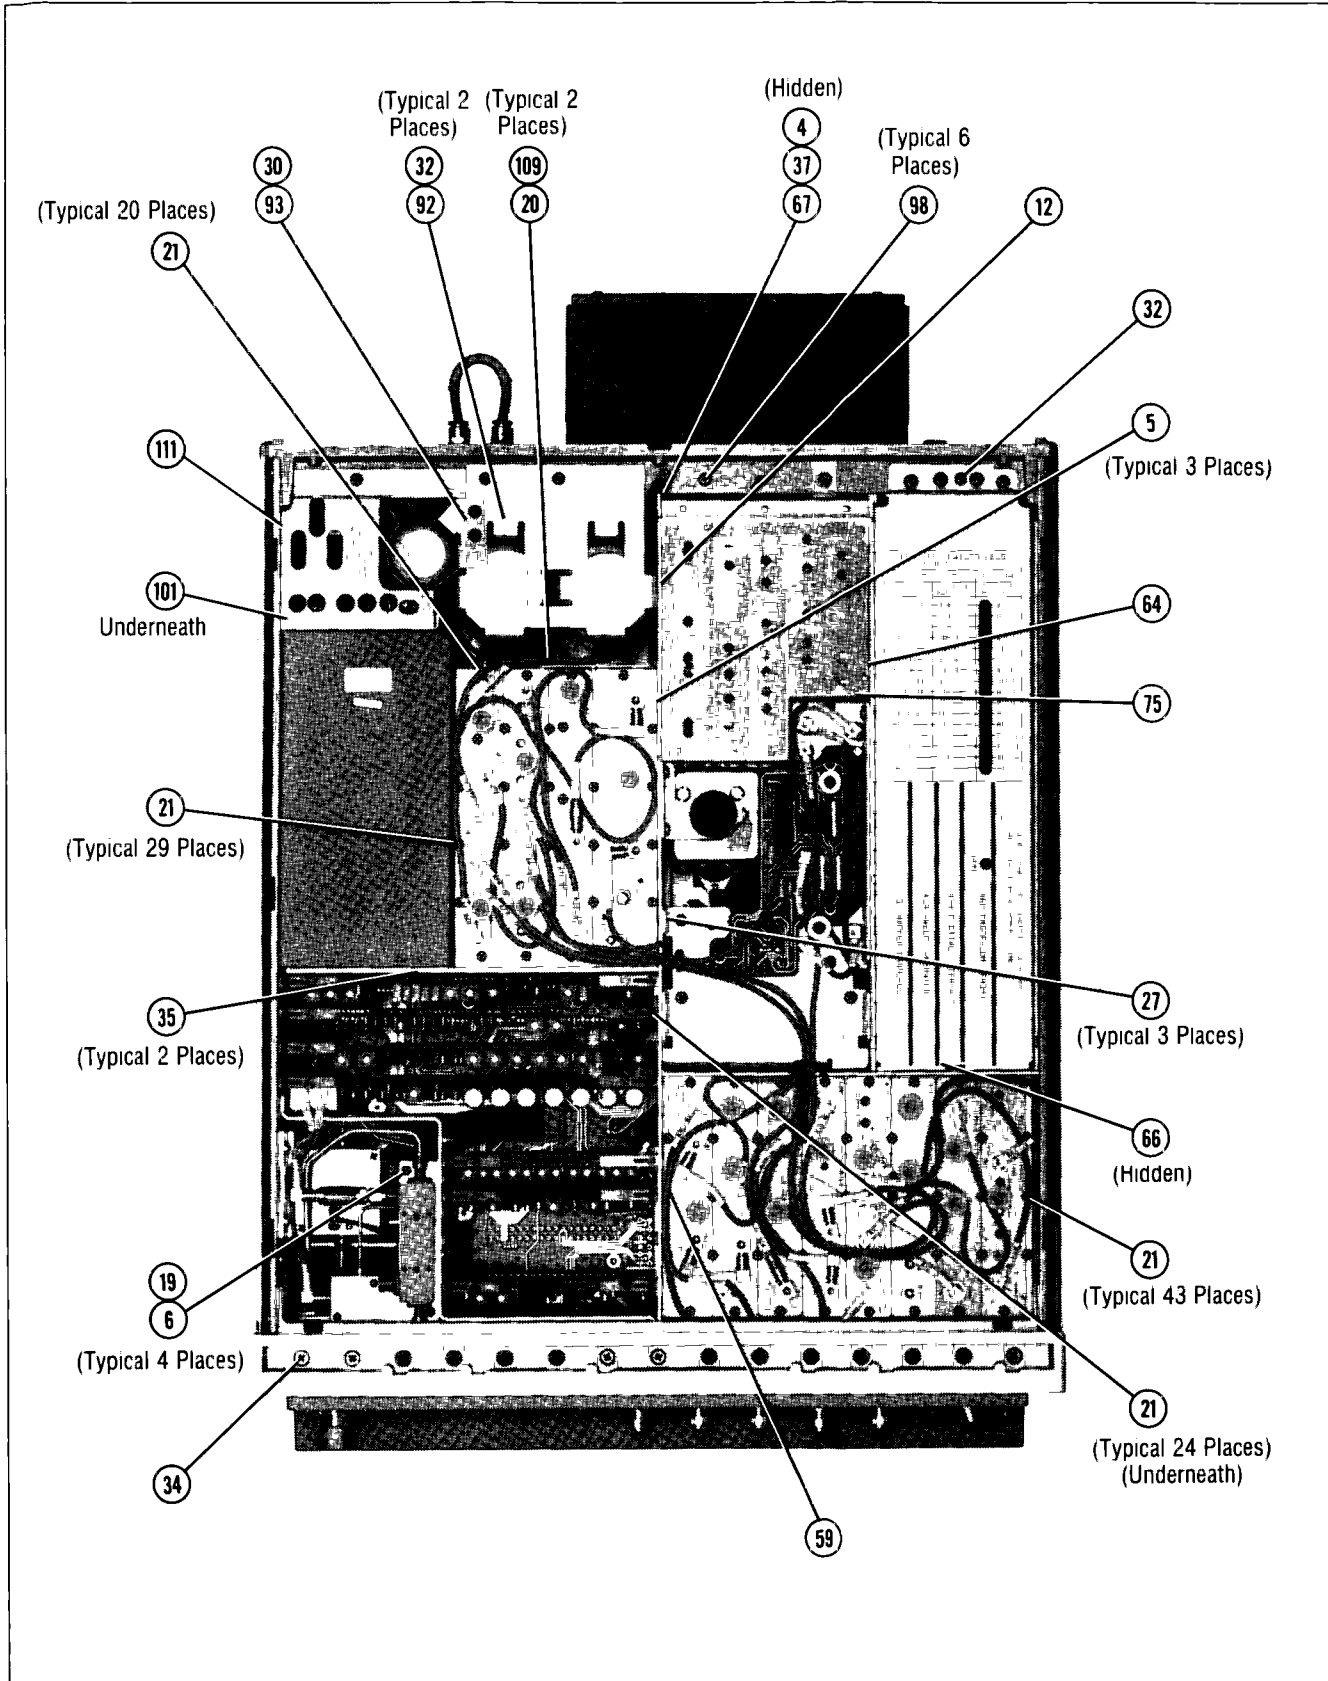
Miscellaneous Mechanical & Chassis Parts (4 of 6)
